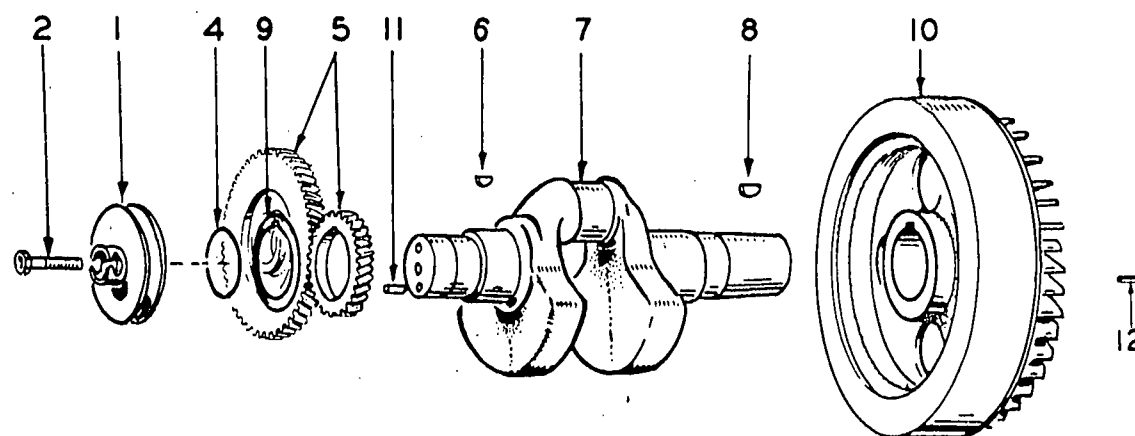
CRANKSHAFT AND FLYWHEEL GROUP
